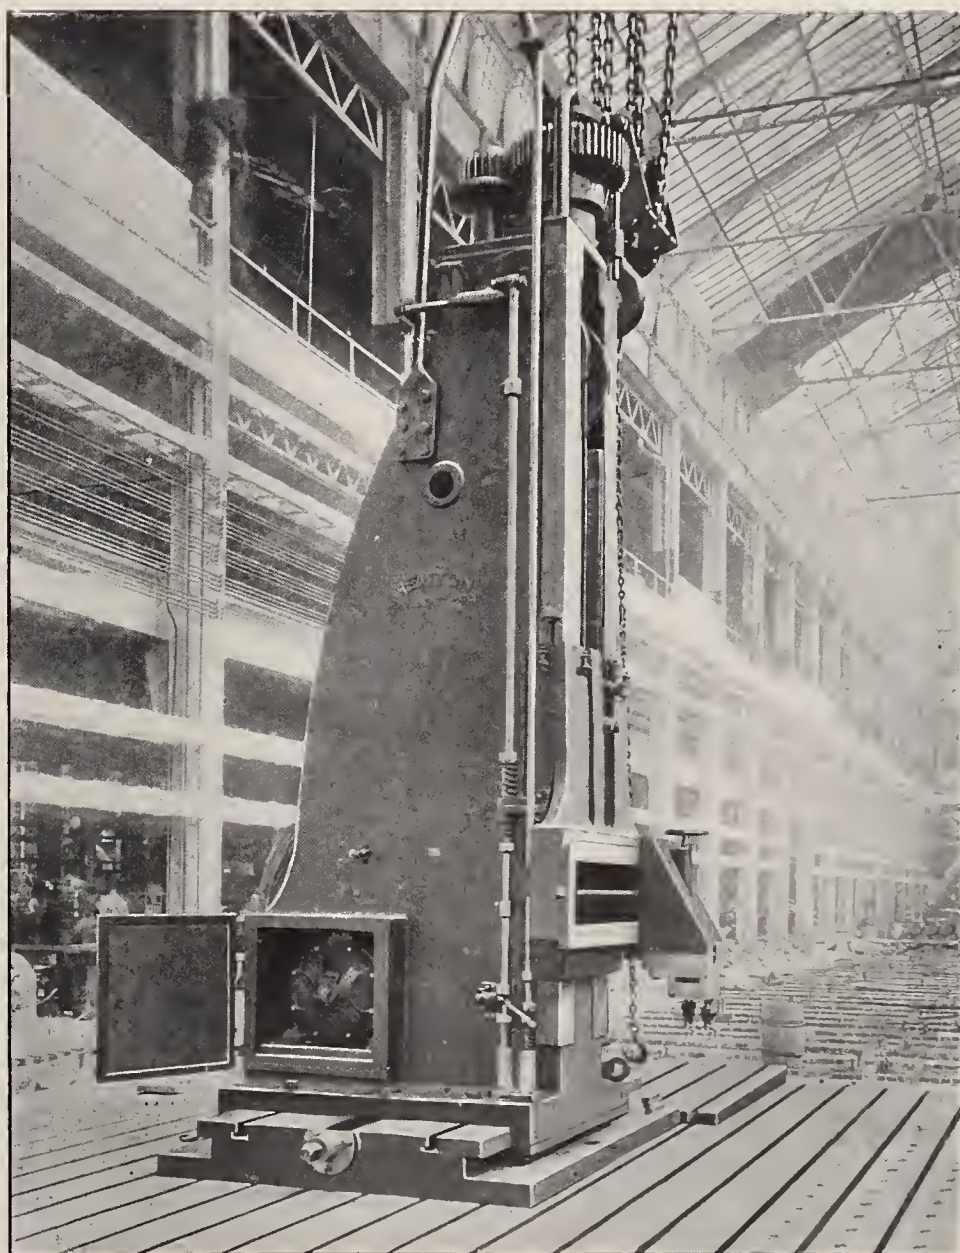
A VERTICAL PORTABLE PLANER OR SLOTTER. BUILT BY THE NEWTON MACHINE TOOL WORKS. THE WESTINGHOUSE INDUCTION MOTOR DRIVING THIS TOOL IS INSIDE THE HOLLOW COLUMN OF THE MACHINE. SEE PAGE 247
